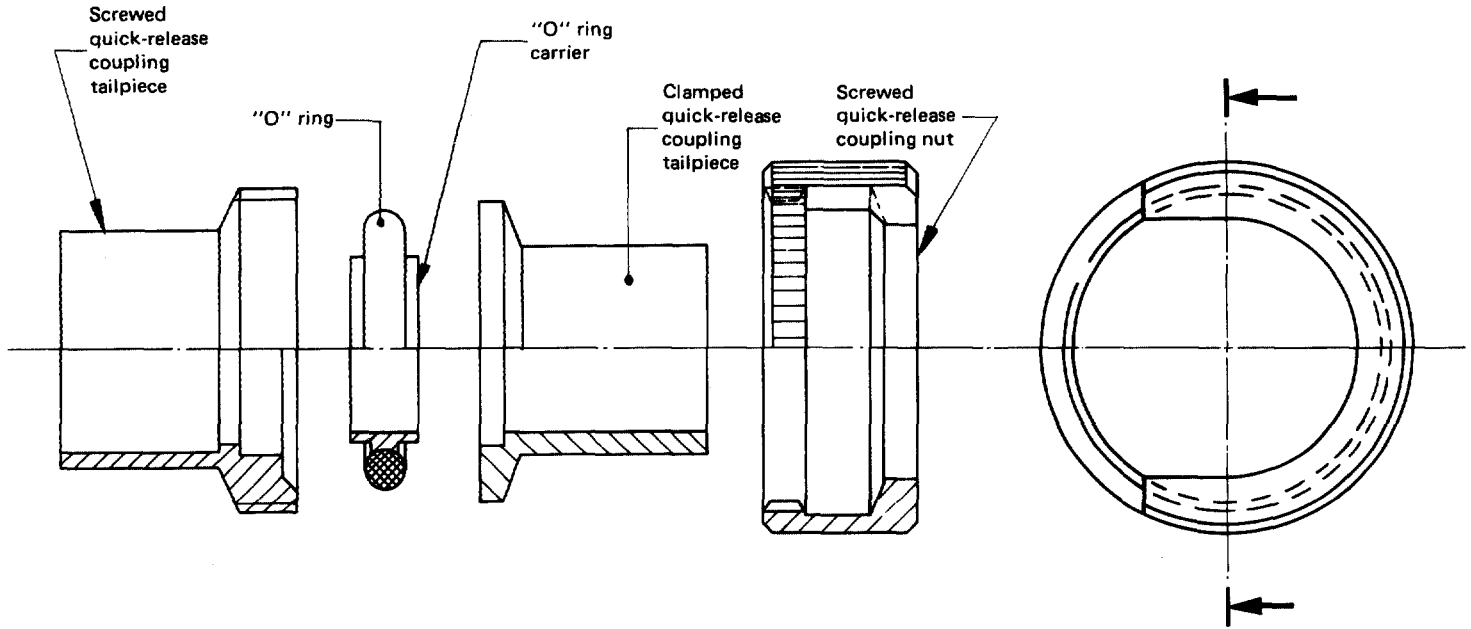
Assembly of screwed-to-clamped quick-release coupling
